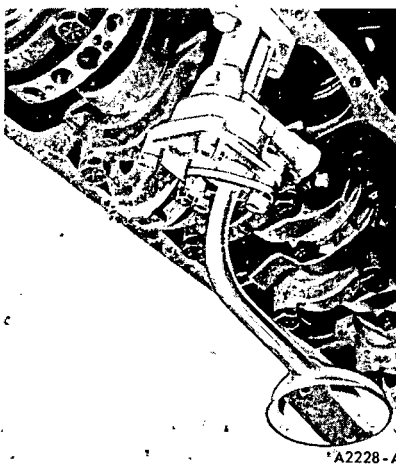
200 Six Oil Pump Inlet Tube Installed
